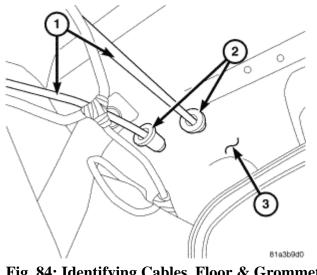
Identifying Cables, Floor & Grommets Courtesy of CHRYSLER LLC
